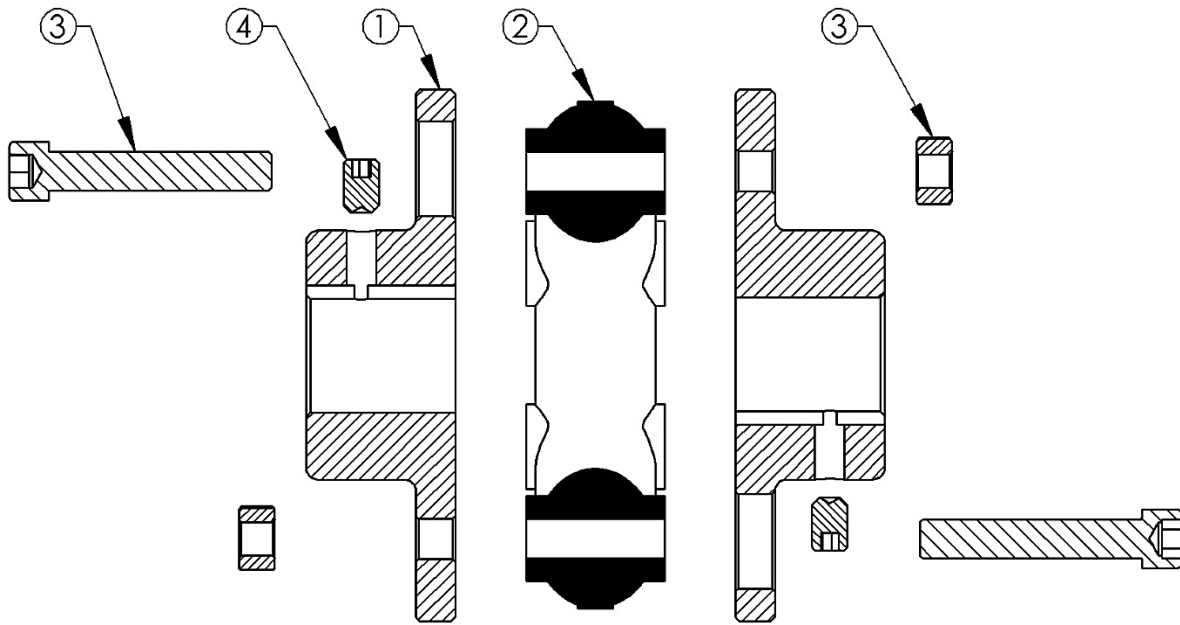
SUPER FLEX COUPLING (EXPLODED VIEW)
